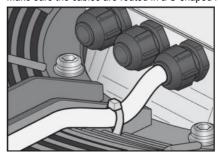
Fan installed lying flat, cable routed as a water trap.
